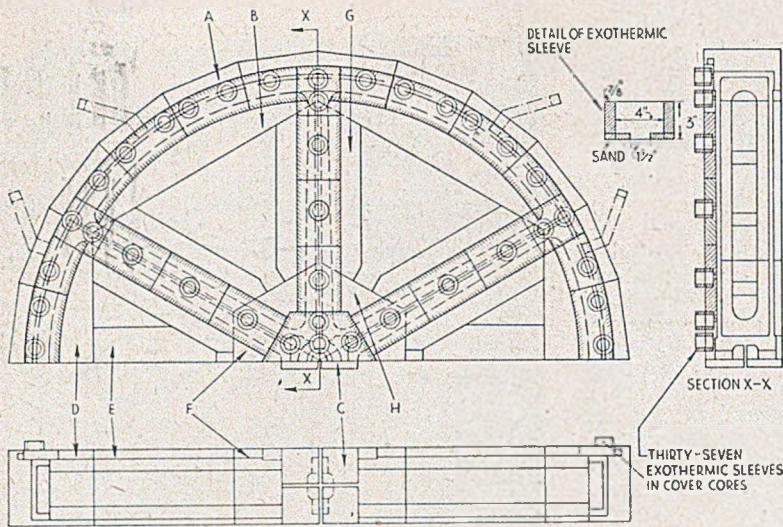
General Layout of the Moulding Equipment for the Large Half-wheel Casting. Details of its Construction are shown in Fig. 3.
